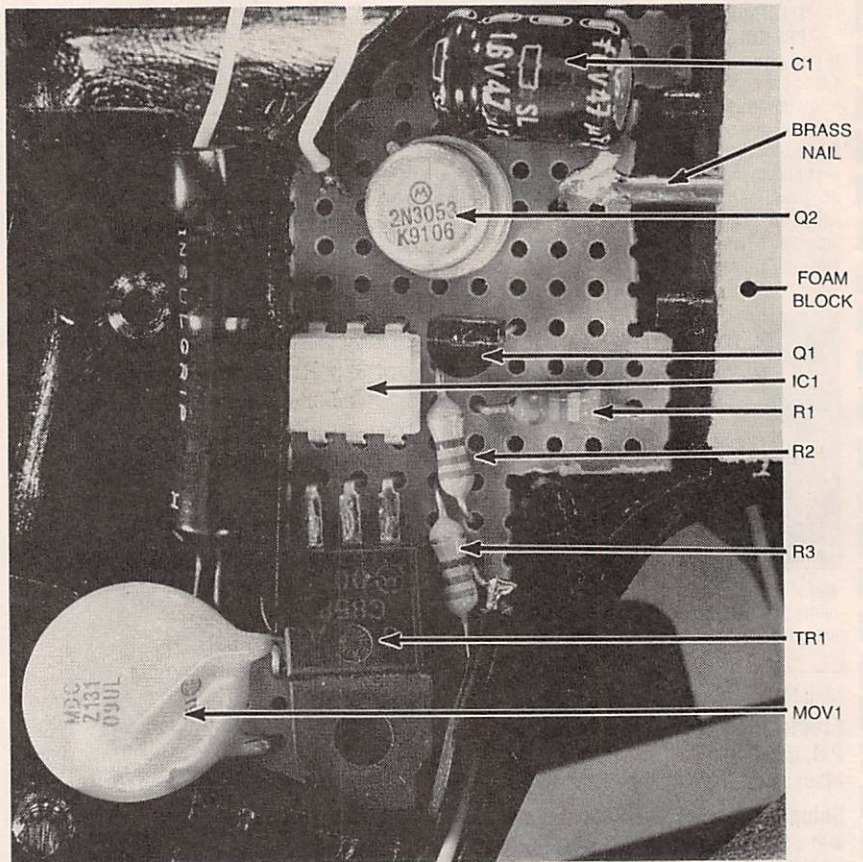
Although a perfboard was used in the prototype, a PC board could also be used. While this photo can be used as a parts-placement guide, you might have to use a different arrangement for your particular gun.
